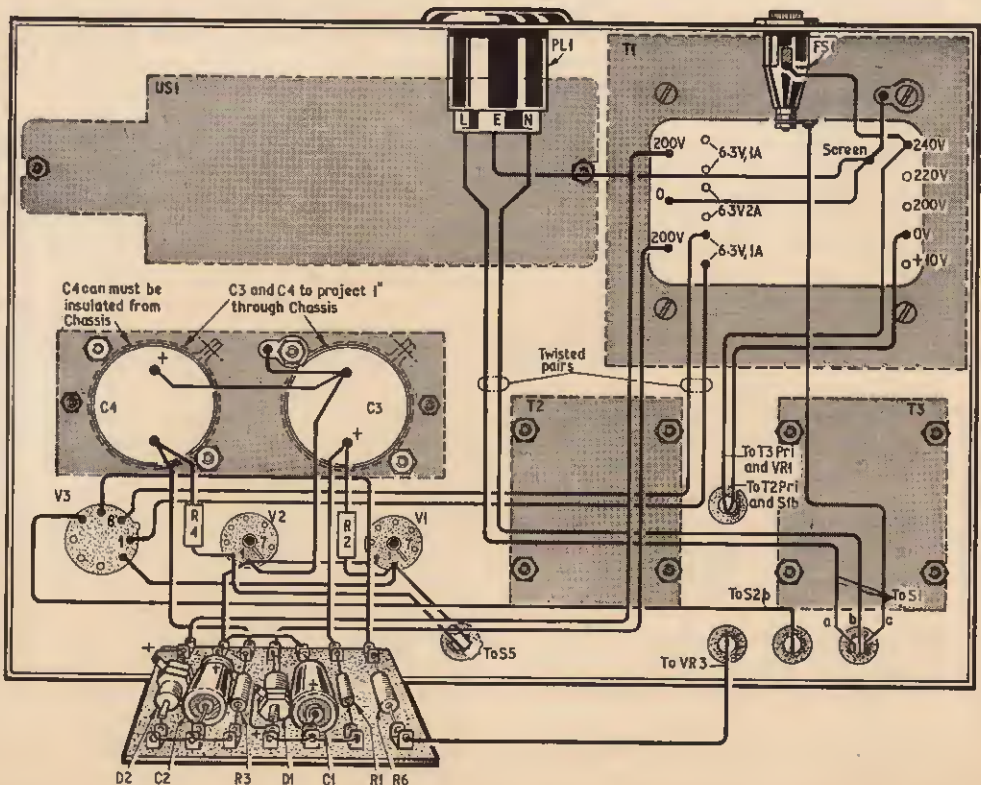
Underside wiring of the chassis. The group board is tilted to show the component wiring clearly
